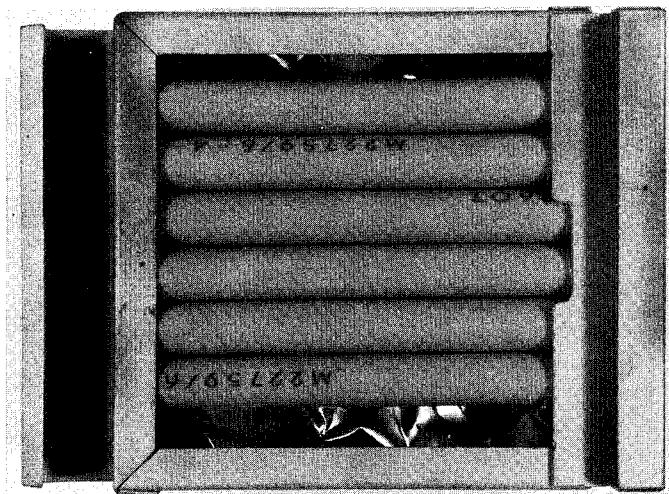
THREE INCH LENGTHS OF LARGER GAUGE WIRE MOUNTED
